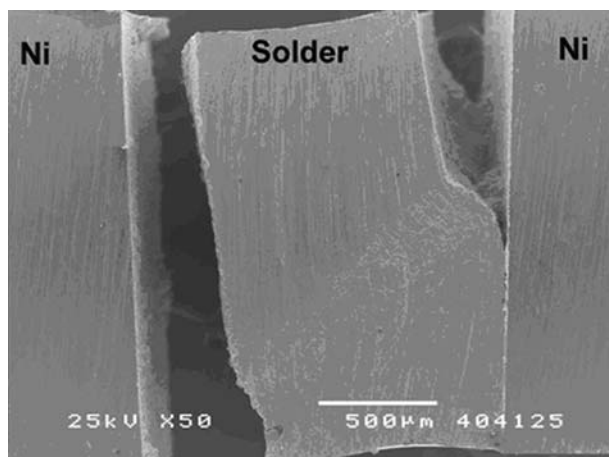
Fracture path of Sn-3.5Ag/Ni-P solder joint aged at 150°C for 625 h.
